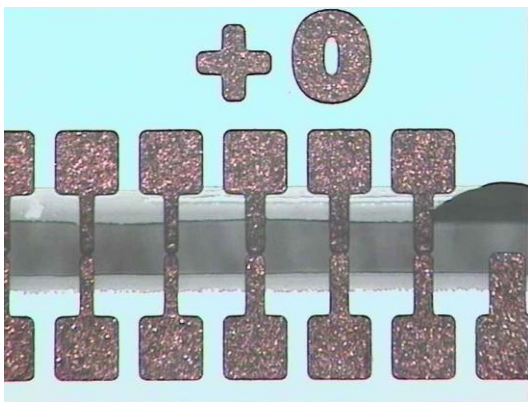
This image shows a section of two die, placed close enough to achieve nodule-to-nodule contact.
